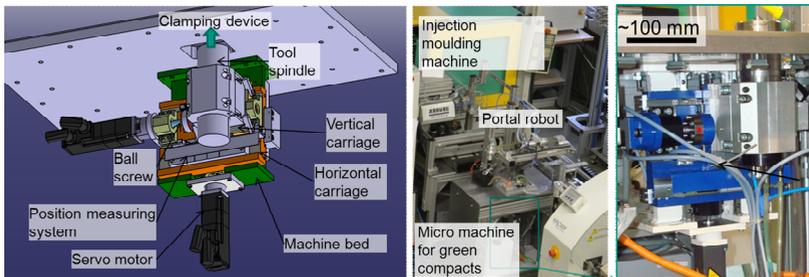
left: Machine design, right: Machine, integrated into the μ -PIM process chain
